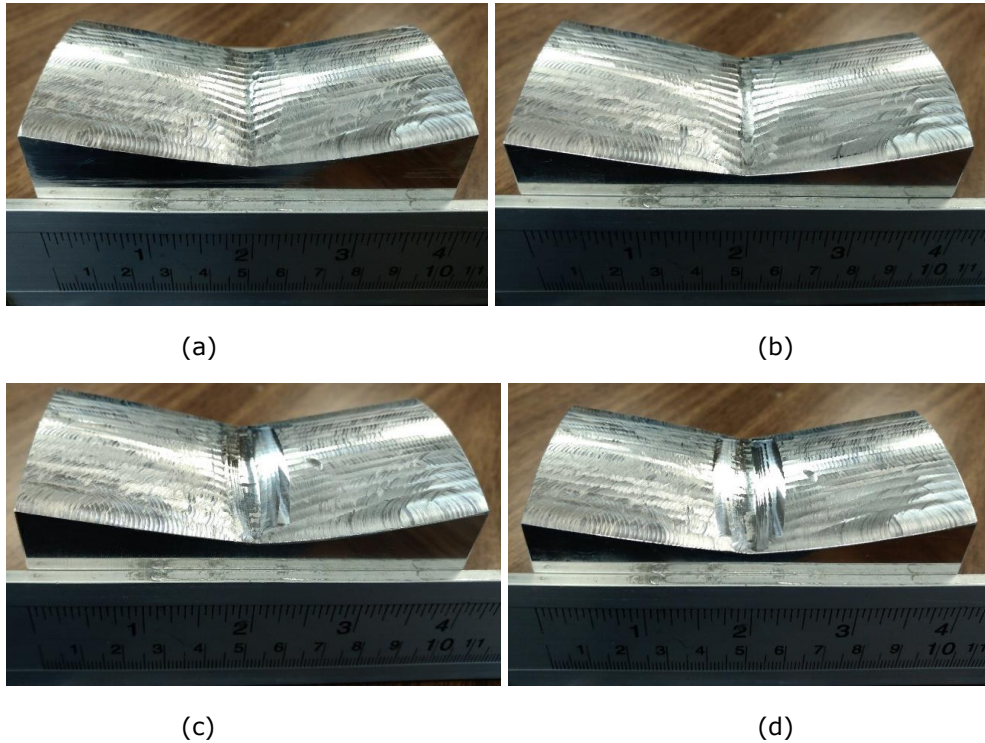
Set of Bi-quadratic convex Bézier surfaces (S_1 towards left and S_2 towards right in all figures) machined on DMU-80P-Hi-Dyn tilt-rotary simultaneous 5-axis machining center: (a) Surfaces rough machined with DTM, (b) radiused corner formed in the common edge region after snugly fit machining pass, (c) Machined surfaces after implementing additional cleanup passes using toolpaths due to tool-drop surface S_2 , (d) Machined surfaces after implementing additional cleanup passes using toolpaths due to tool-drop surface S_1 .
